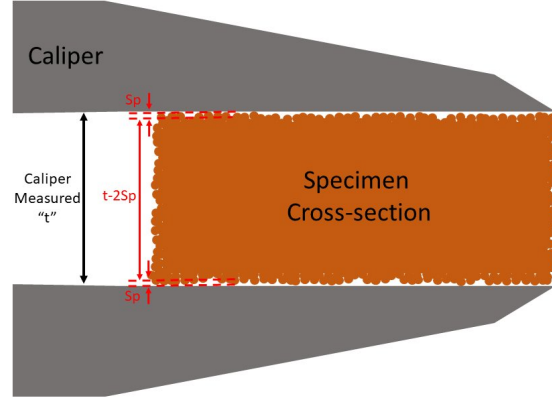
Illustrates an exaggerated schematic of a L-PBF specimen’s cross-sectional area being measured using calipers. Note that calipers make contact with the highest peaks on the surface of the specimen. Thus, removing the Sp from each as-printed surface removes the highest peaks measured, approximating the value to the mean surface plane.
